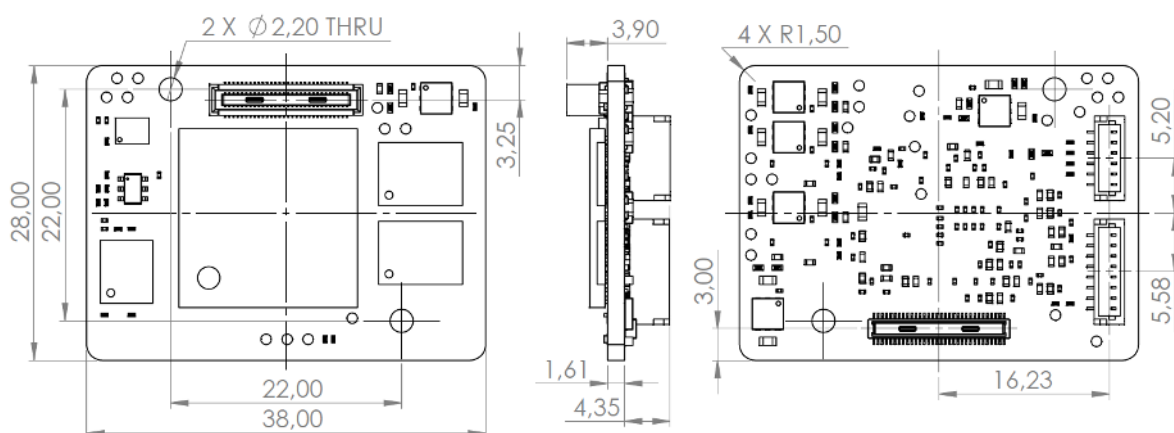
Mechanical drawing: Framos Sensor Adapter (FSA) location in the FSM-IMX636 Devkit
